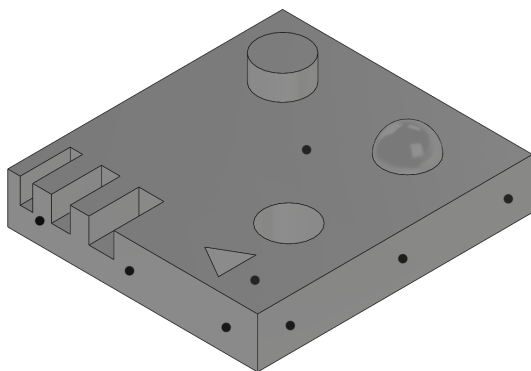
Test part geometry with external dimensions 20 mm × 22 mm × 4 mm; black dots indicate the measuring points in x , y and z direction
